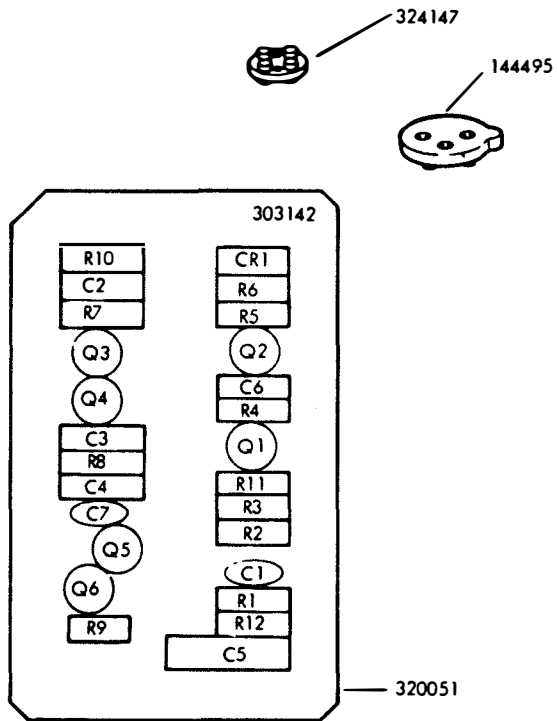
Clutch Magnet Driver Circuit Card 321991
